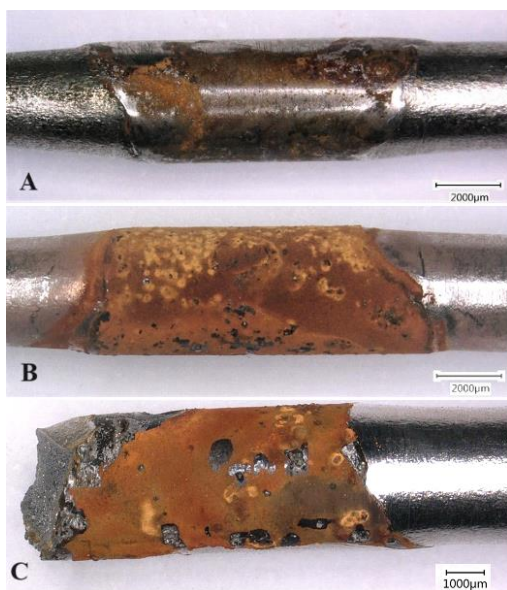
Weld joints of specimens after SSRT obtained by stereomicroscopy
